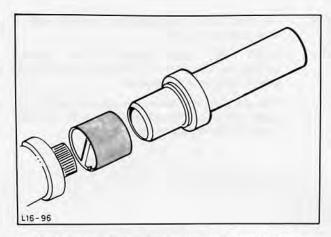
Press in extension housing bush with Special Tool No. 16-015
